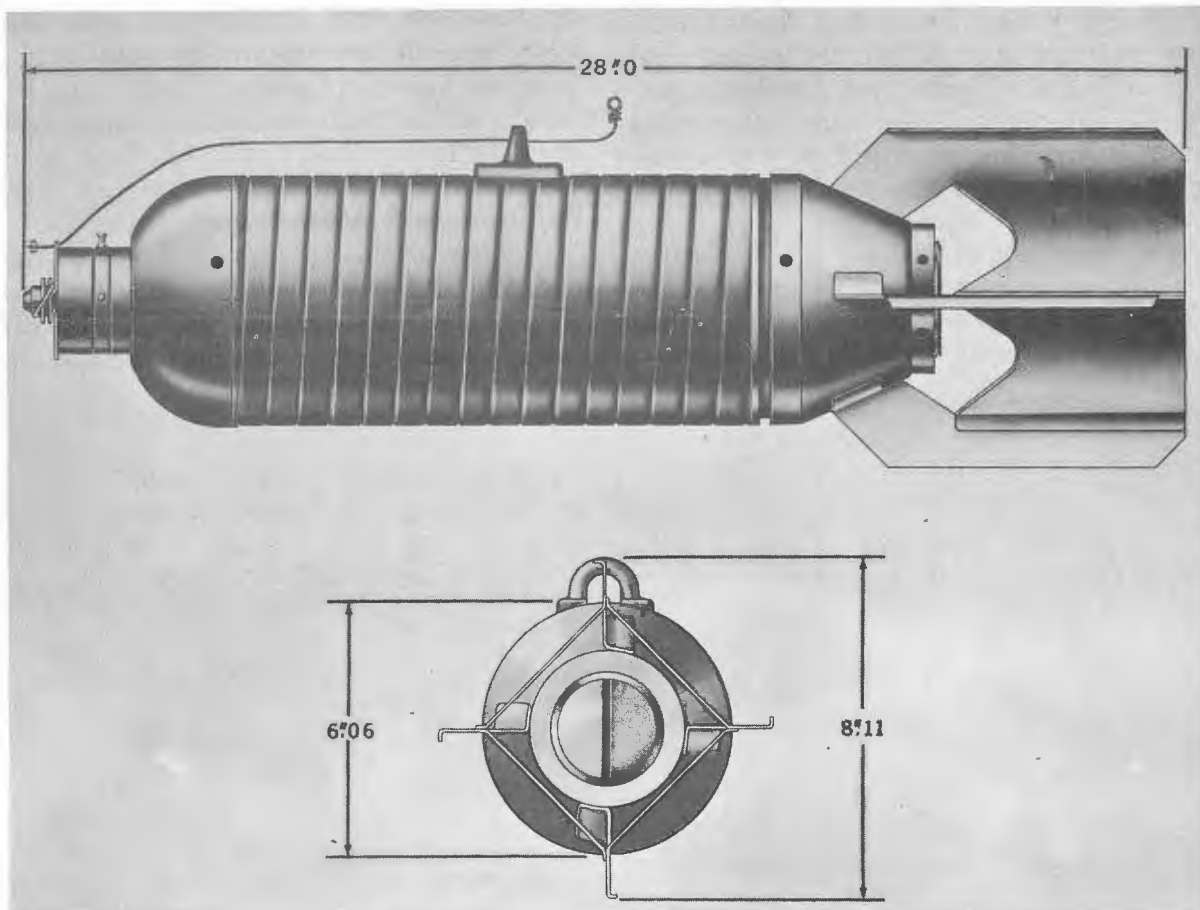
90-lb Frag Bomb M82, Exterior View.
